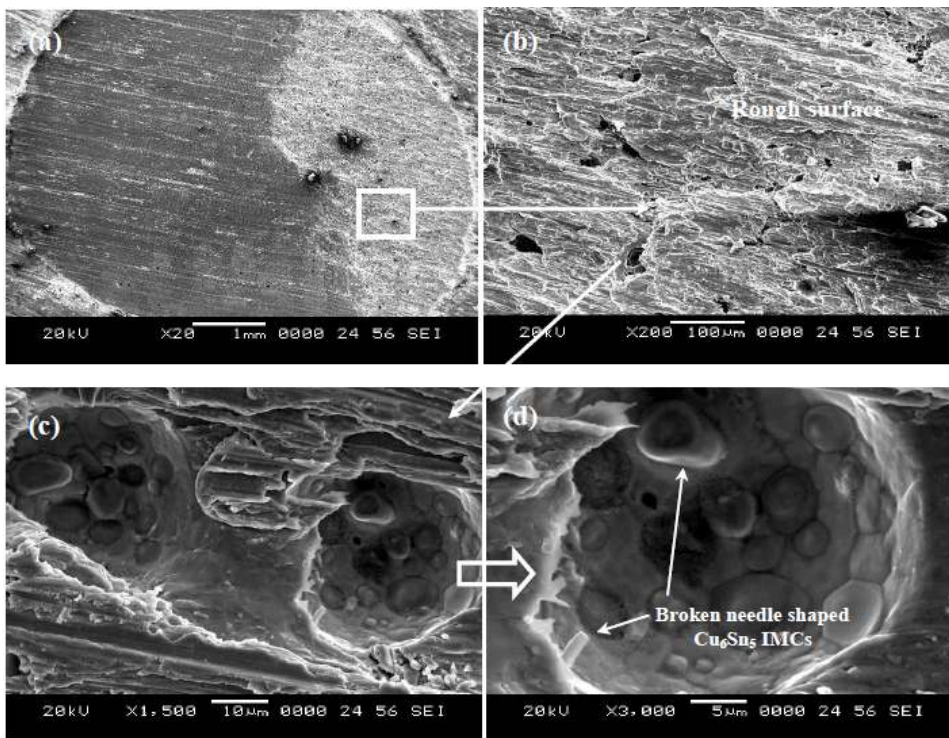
SEM micrographs of the fractured surfaces of Sn-0.3Ag-0.7Cu solder on rough Cu substrate surface (a), (b) at lower magnification (c), (d) at higher magnification
